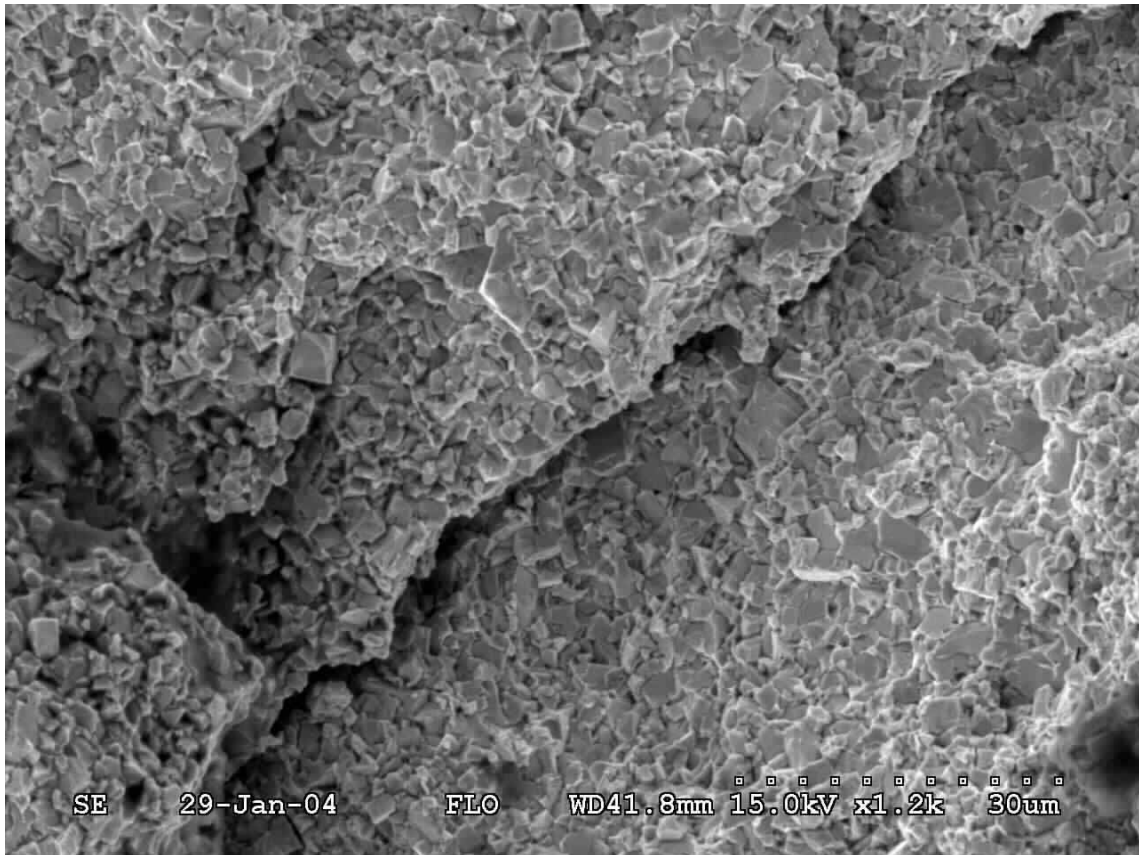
Fracture surface of WC-Co hardmetal in three point bending test.
